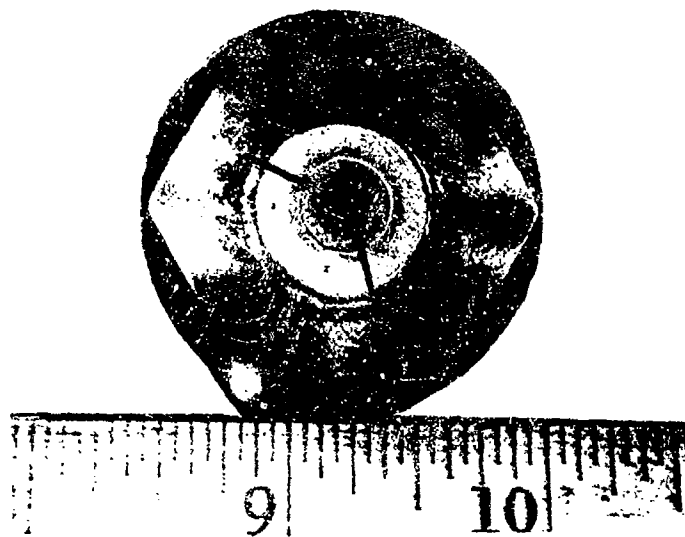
Photograph of bushing assembly, as-received, with arrows pointing to the damaged tungsten carbide of Bushing 1.
